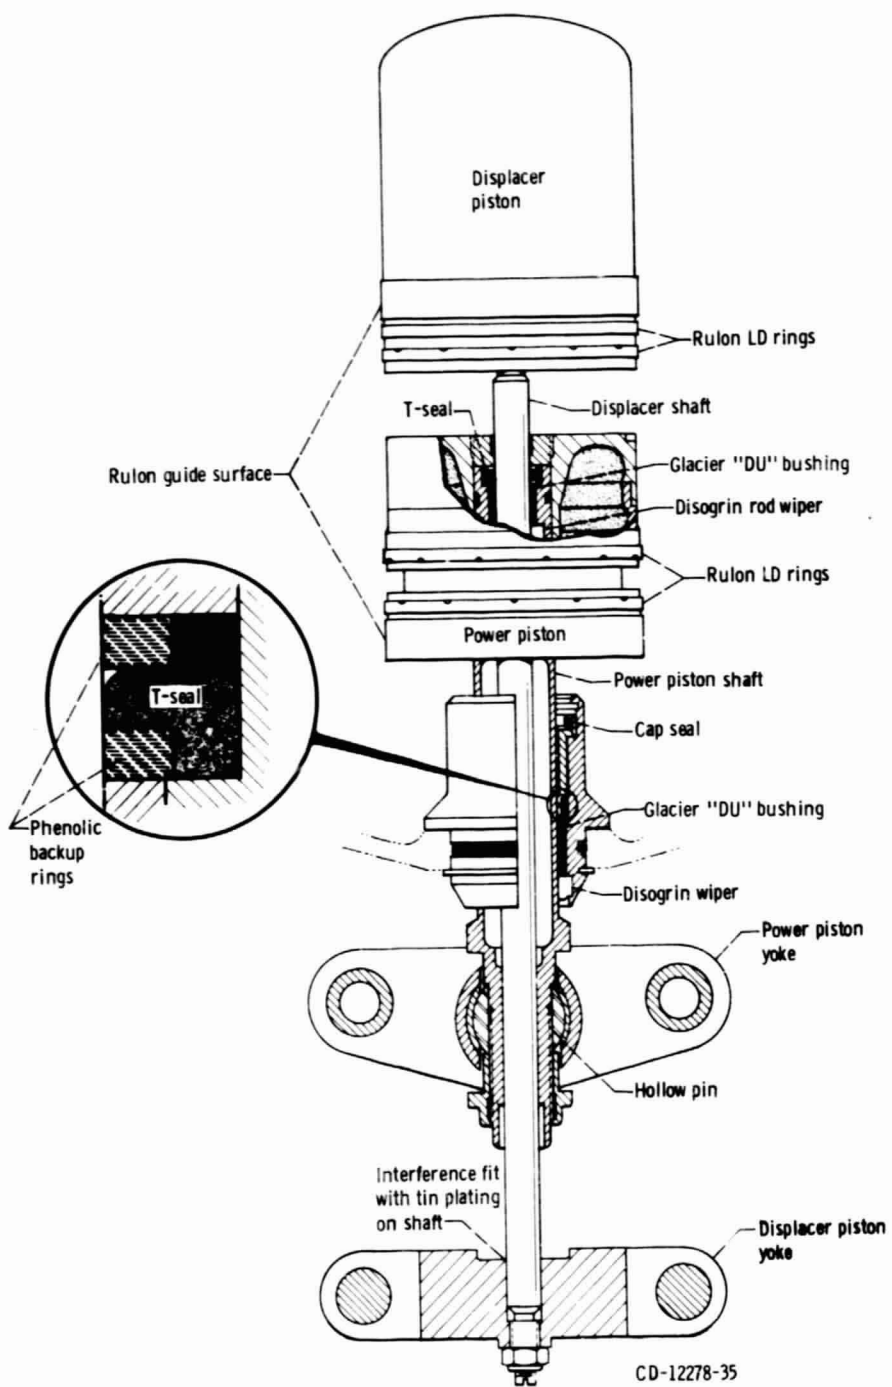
GPU 3 pistons, shafts, and seals assembly.
